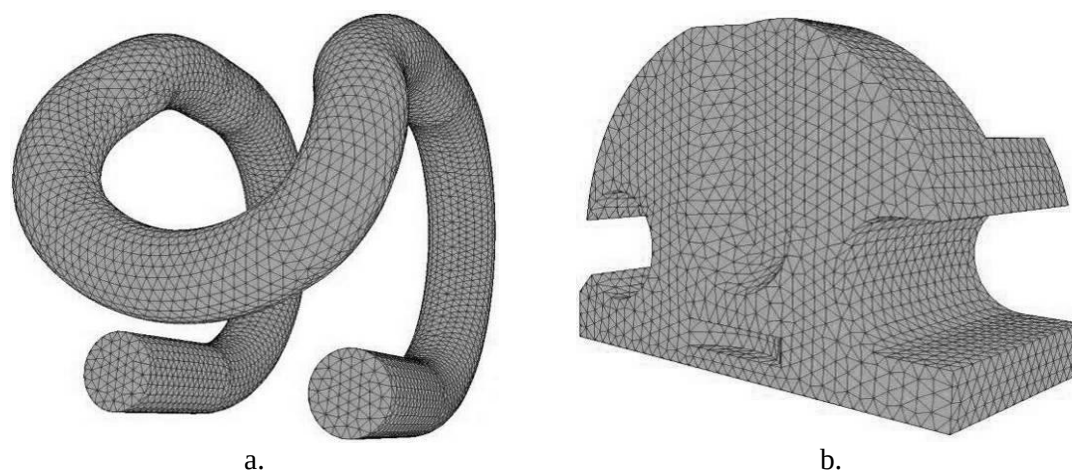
Discrete models of rail fastening parts: a. spring clip, b. anchor head
